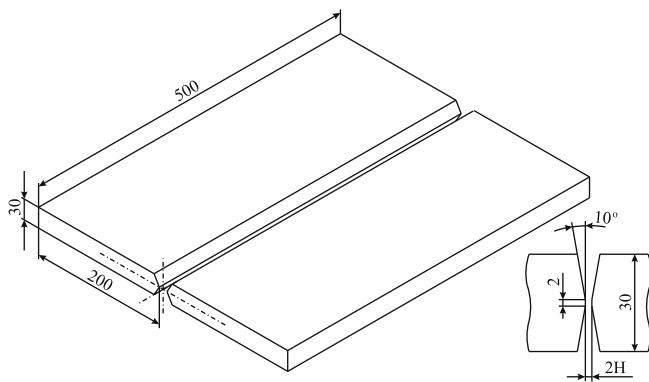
Welding arrangement (2H = 6, all units in mm).
